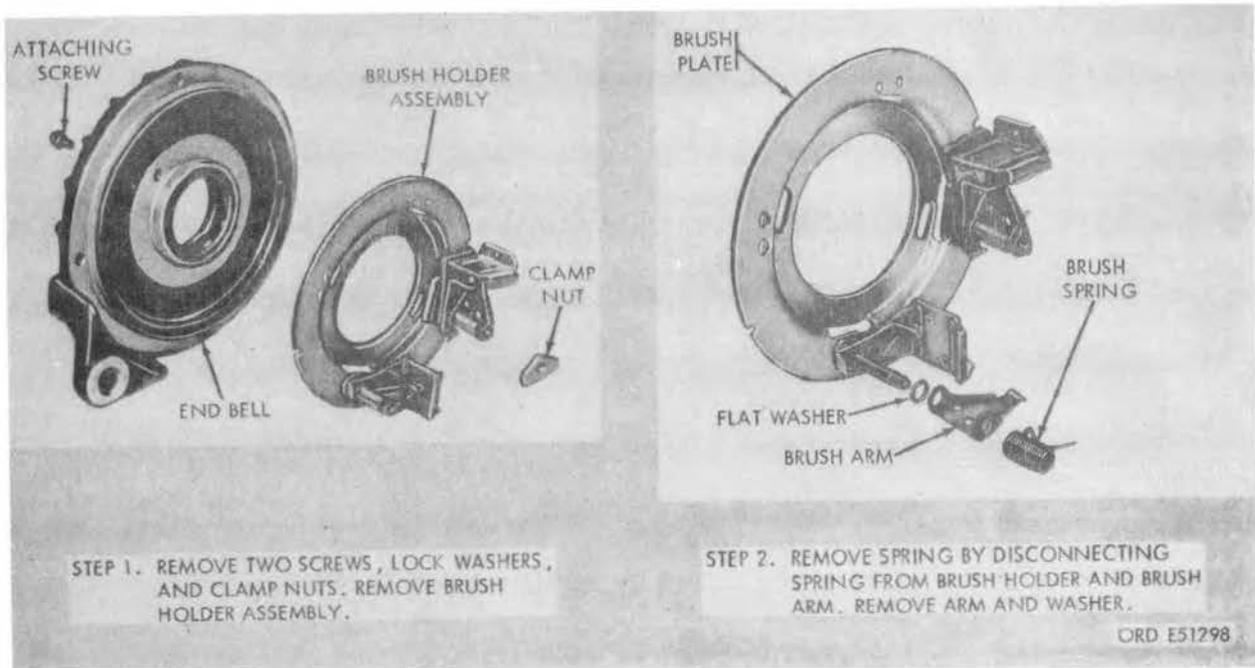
REMOVING BRUSH HOLDER ASSEMBLY AND BRUSH ARMS.
